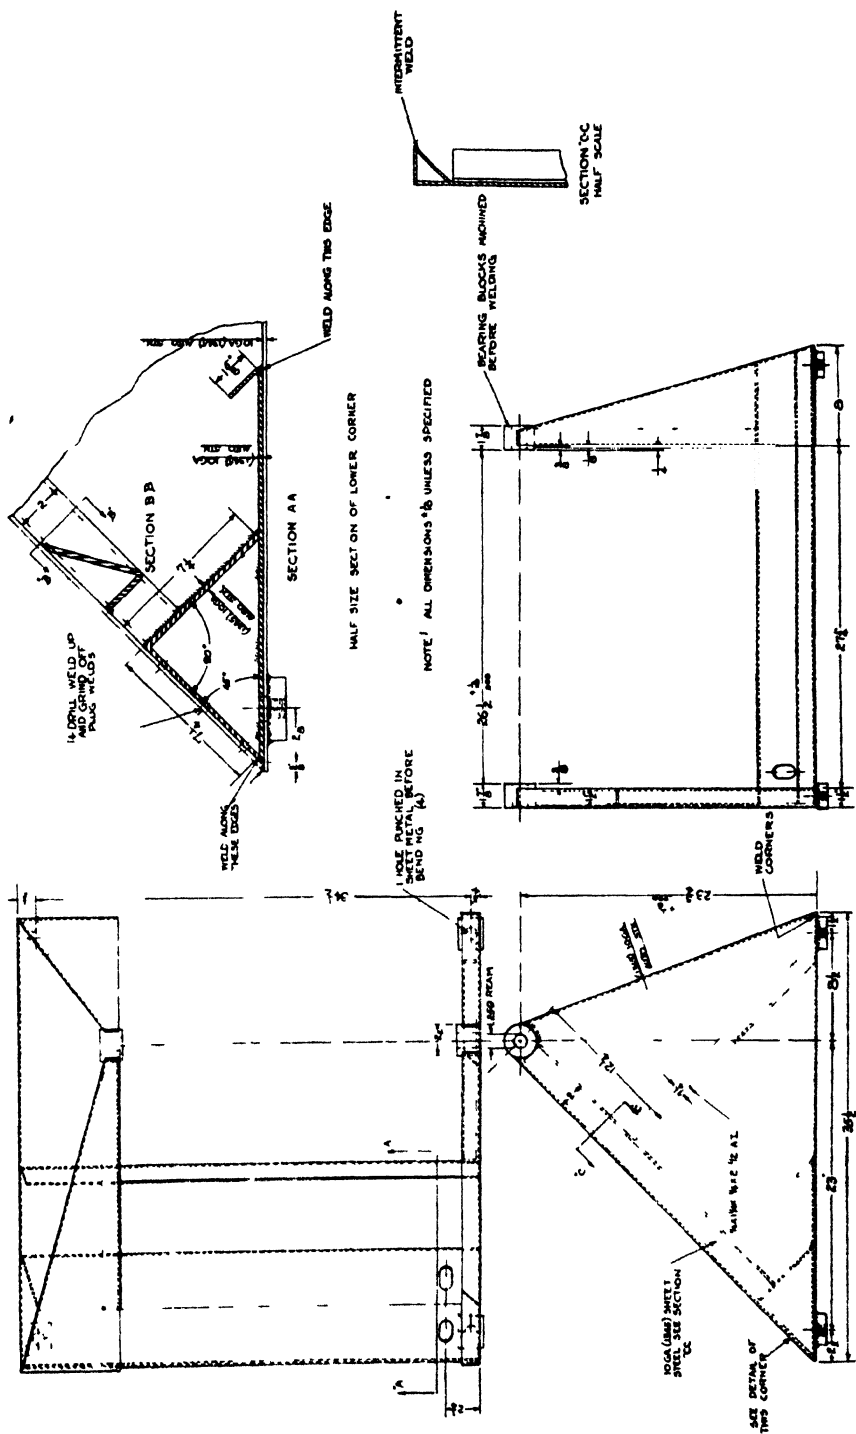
Base of tilting fluoroscope designed for arc welding.
